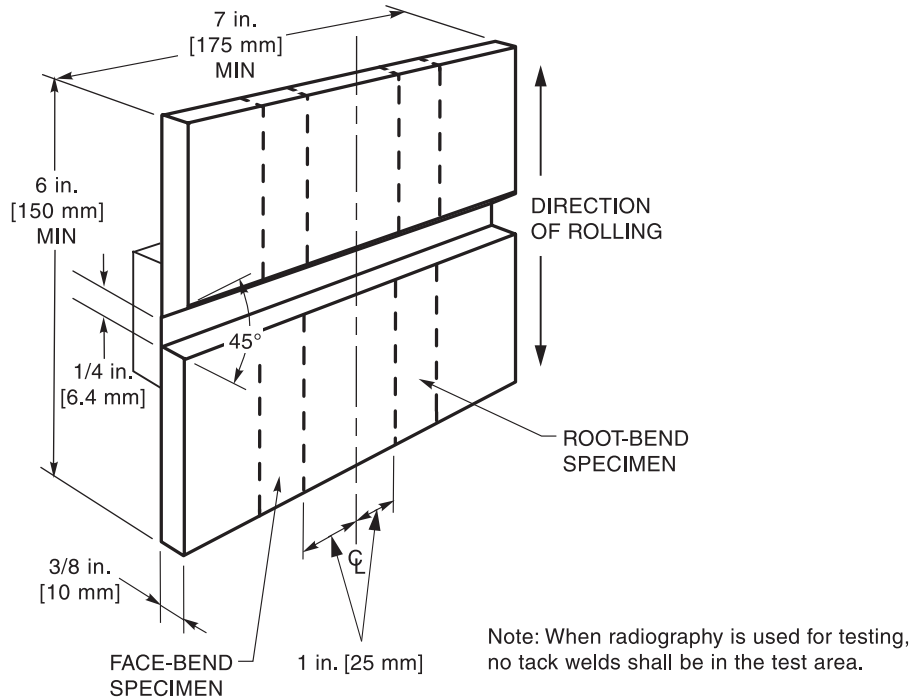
B—Optional Test Plate for Limited Thickness, Horizontal Position—Welder Qualification
